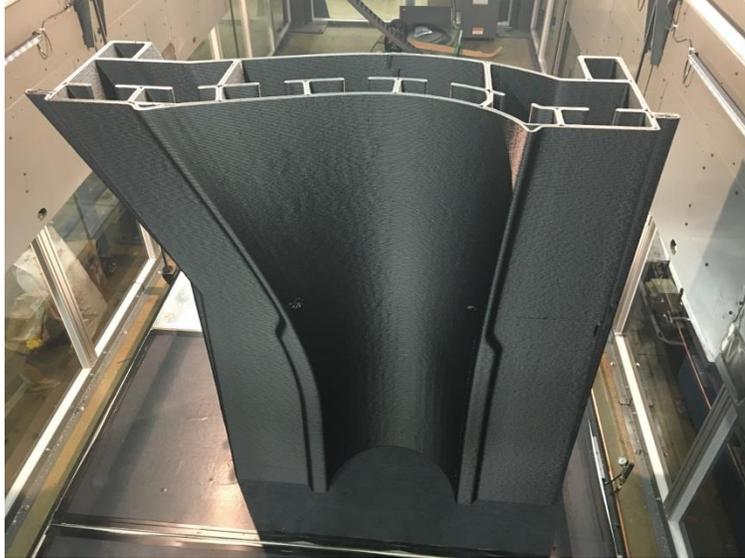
Printed low pressure side section 1 in the BAAM CI printer
